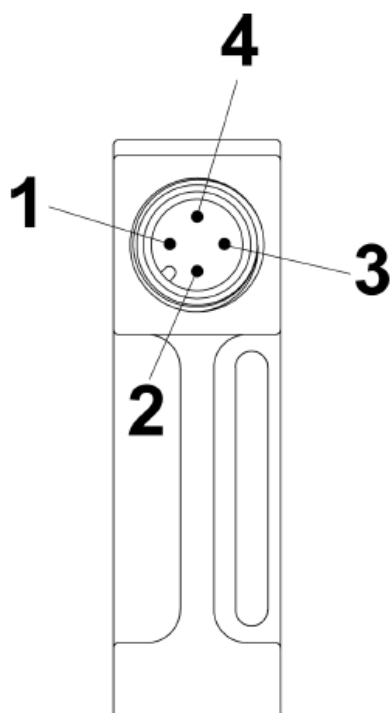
Pin assignment, connector M12x1 (Form 15x50)
